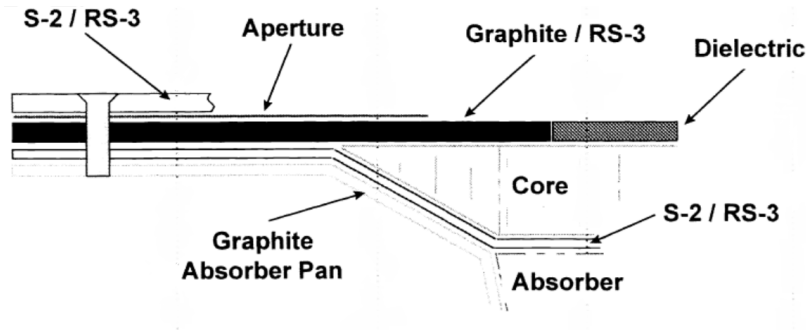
Cross-sectional view of S3TD assembly [8].
